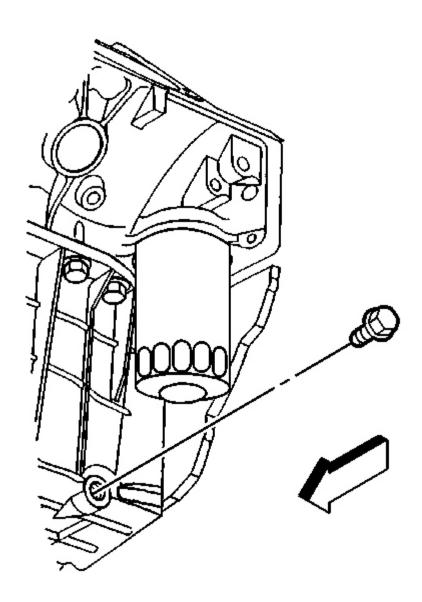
Identifying Oil Drain Plug Courtesy of GENERAL MOTORS CORP.
